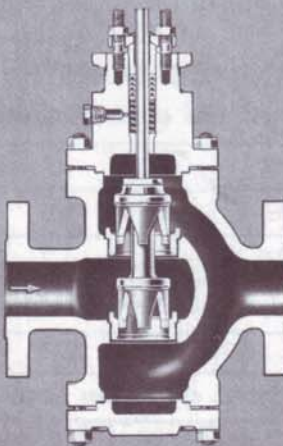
Double port Design "A" body with port guided V-Port valve plug.
